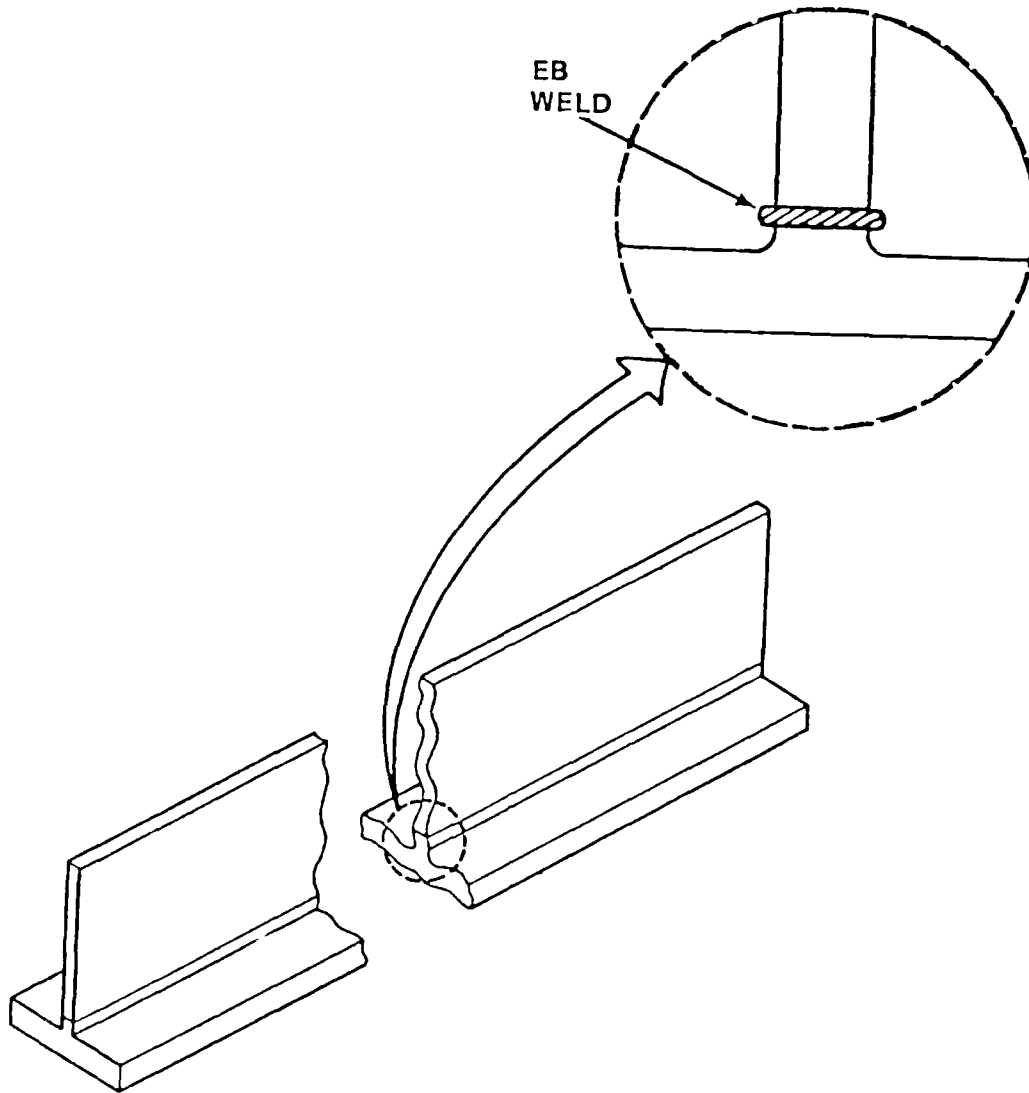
JOINING T-STIFFENER FLANGE TO WEB WITH EB
